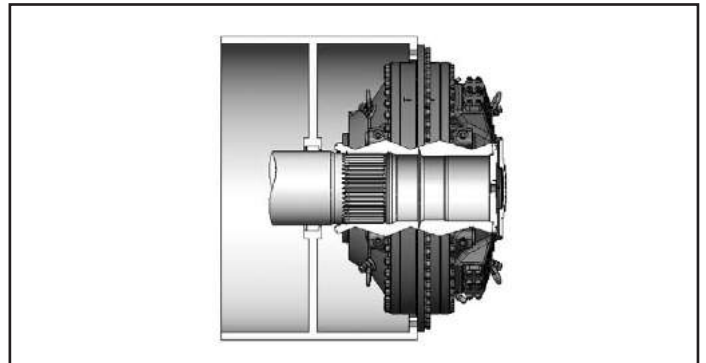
Flange mounted motor with splines and low radial load from driven shaft.
